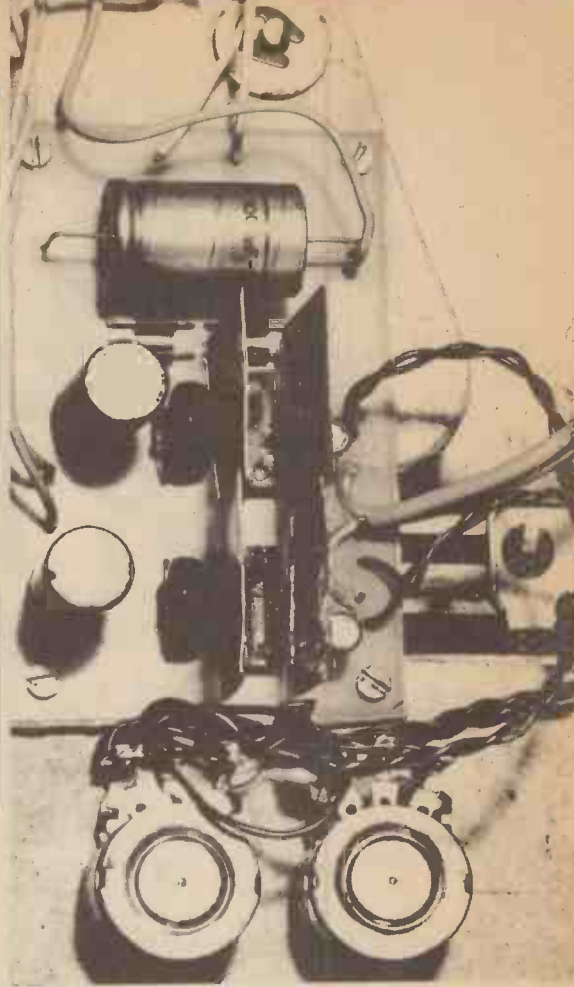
Printed circuit board. Full size 97 x 61mm.
